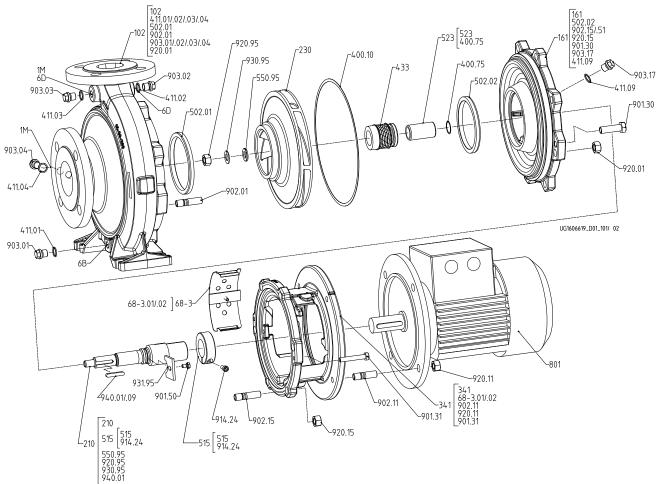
Model with single mechanical seal and bolted casing cover, with pump foot
